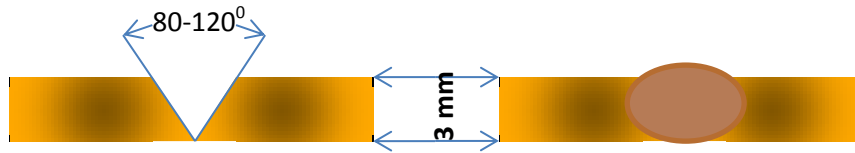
Schematic drawing of weld configuration (side view). Left the two ends of pipe before welding with a v-groove of 80-120 degrees. Right is the weld itself, a single pass was sufficient.
